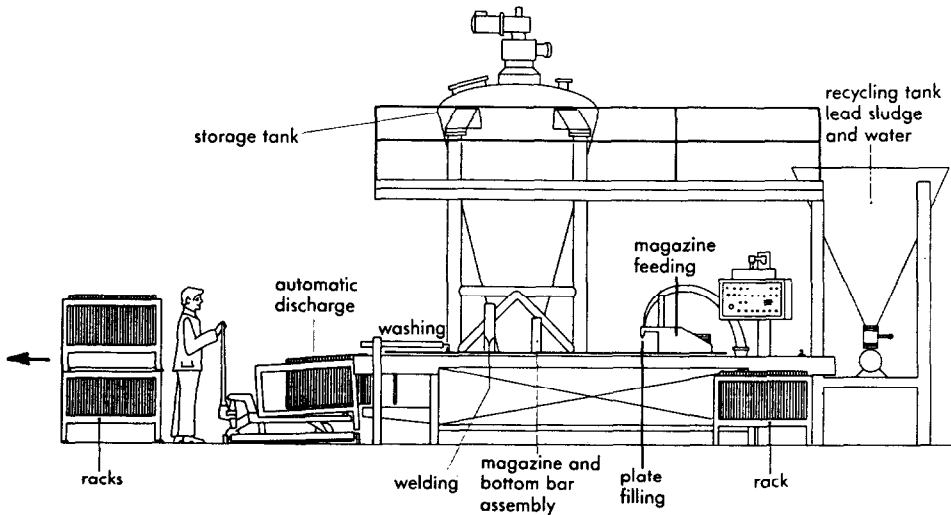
HOPPECKE oxide-filling machine for tubular plates.
